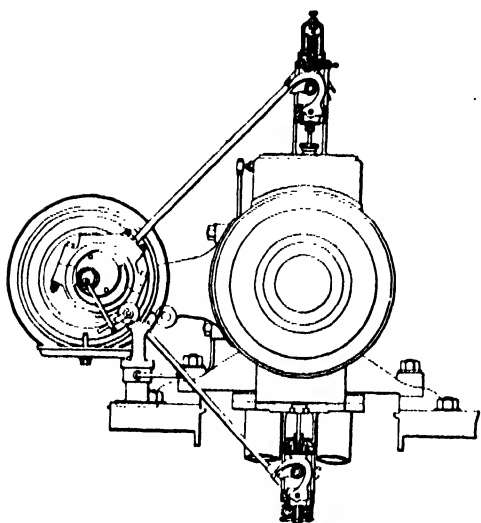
Recke Ruston Gear by Ruston, Proctor, & Co.
